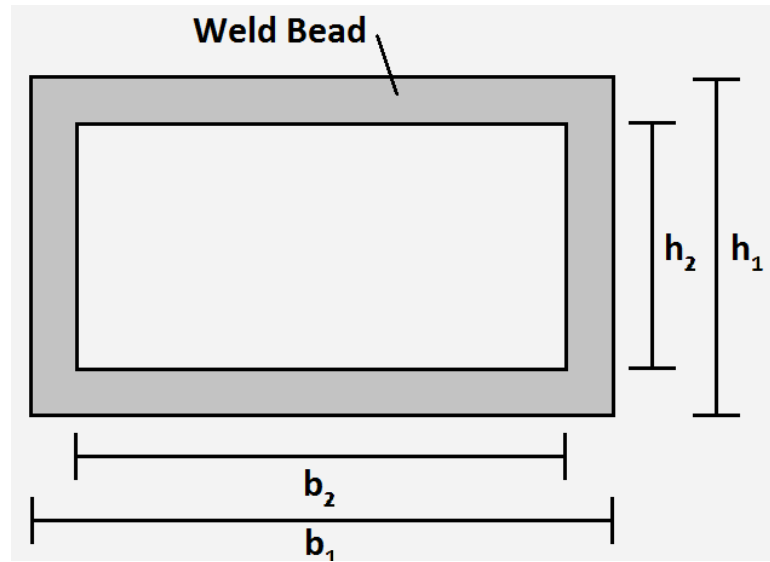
Weld bead around the lower plate connecting it to the side plates.
